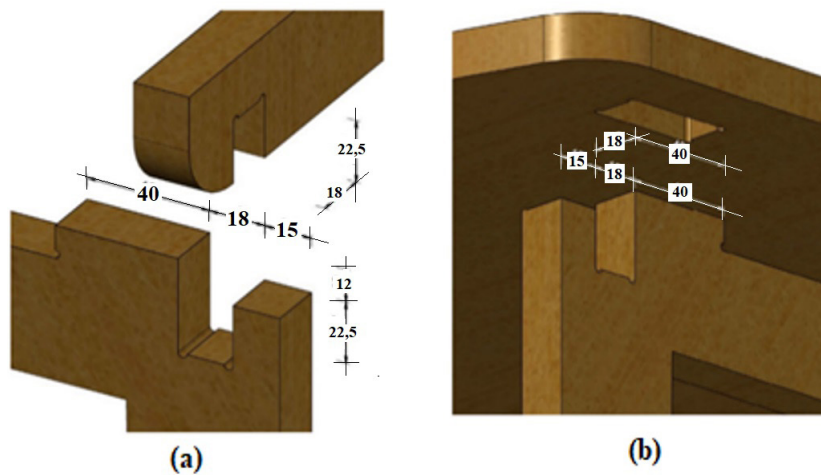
Detail of side frames-rail connections, and (a) Seat and (b) Backrest connections.
